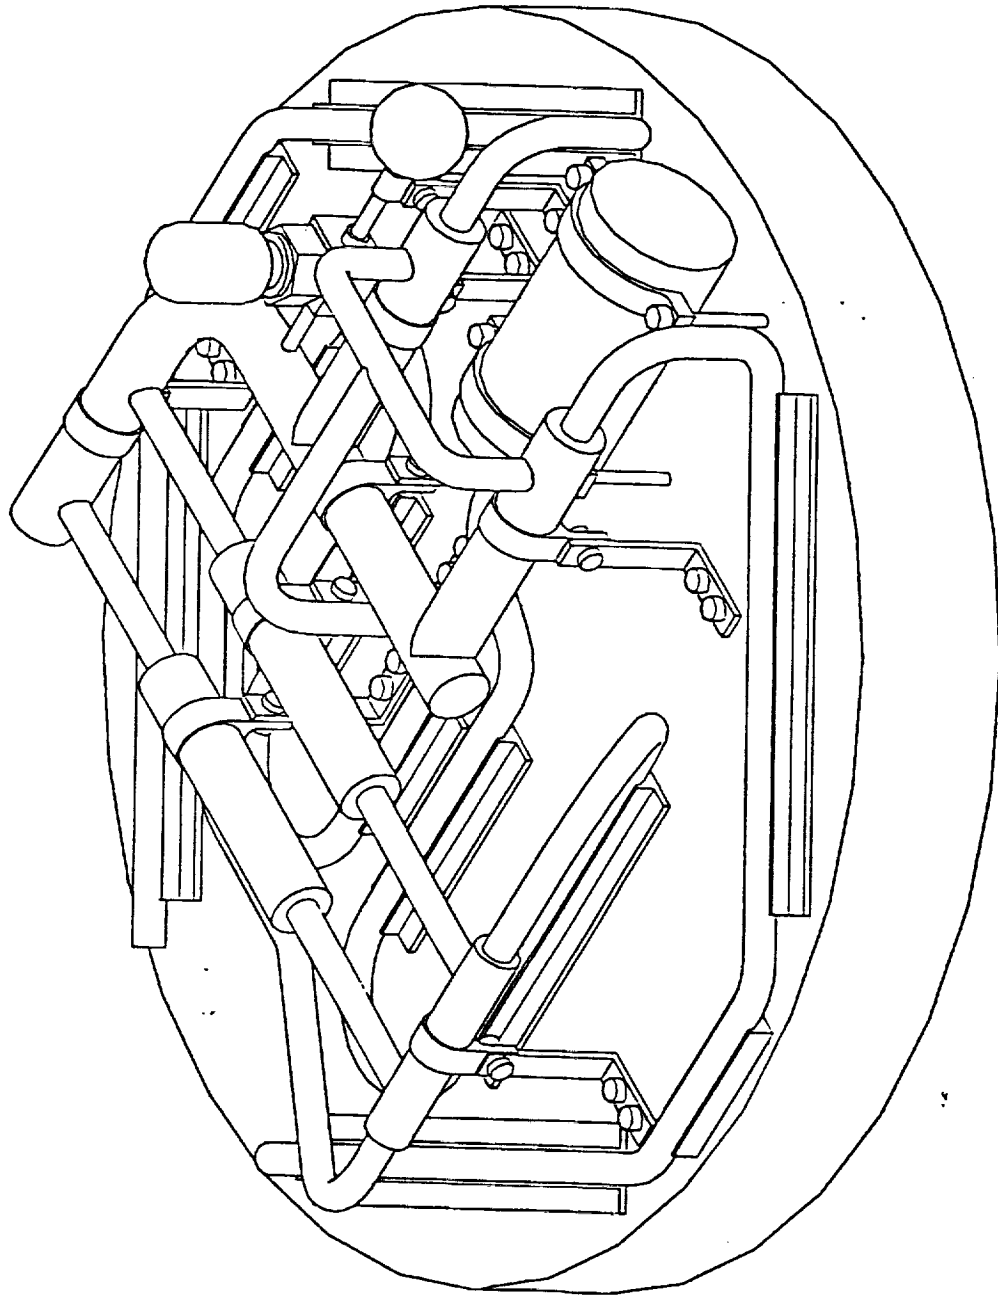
Preliminary Experiment Layout on Mounting Plate (Isometric View)
